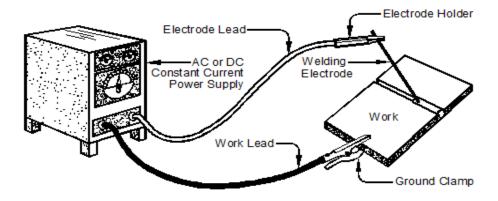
6 - Equipments of Shielded Metal Arc Welding. [F]
